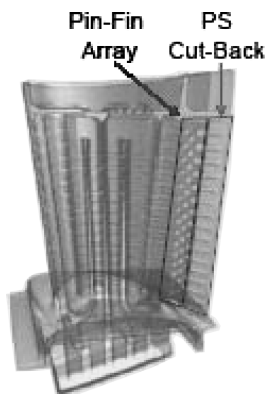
Cutaway view of turbine blade, from Martini et al.⁴
